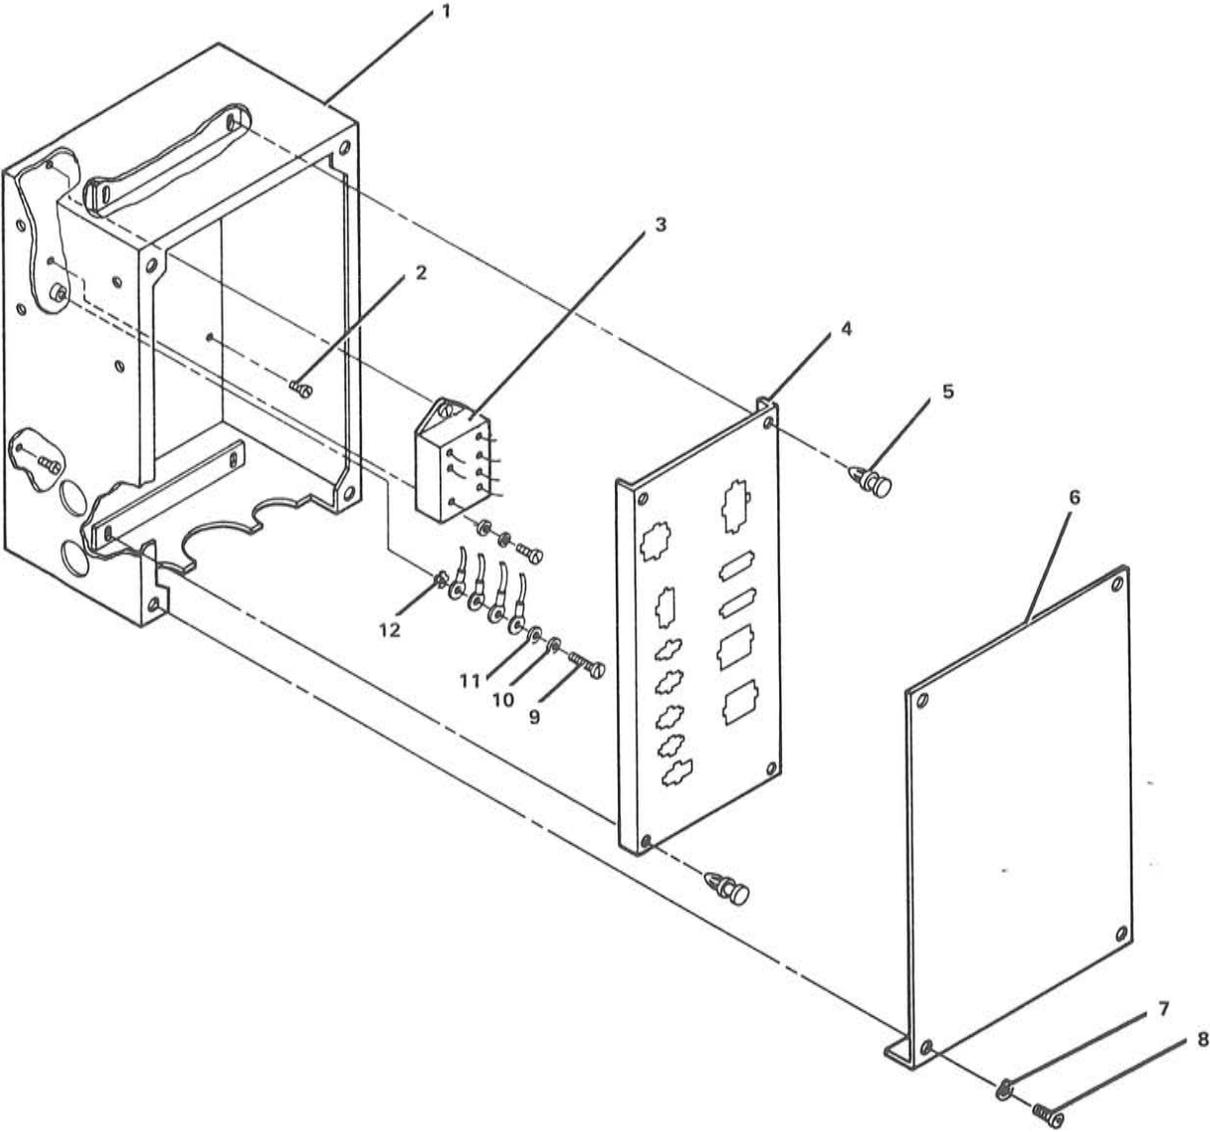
OUTLET BOX ASSEMBLY. SEE LIST 7.
